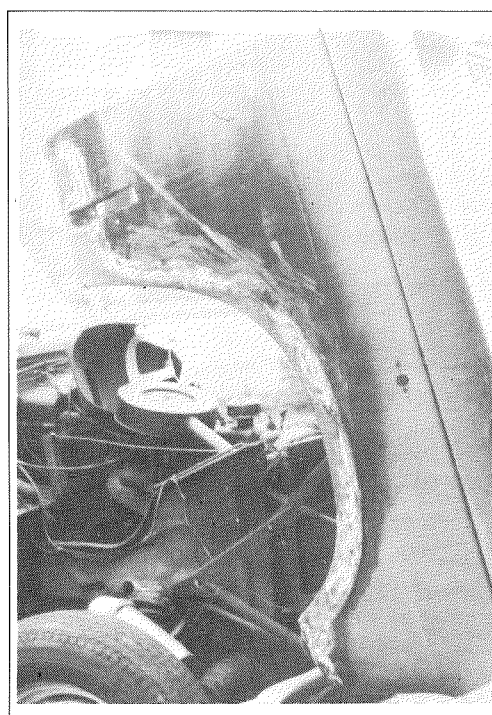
It may be that this type of repair panel has improved since I had a go at fitting one or simply that I'm not skillful enough but I would always much prefer to fit a whole wing (either front or rear) than fit the equivalent repair as that shown here. The repair job takes much longer, requires more skill including avoiding heat distortion and in the end probably won't look or last as well as a full panel replacement.
